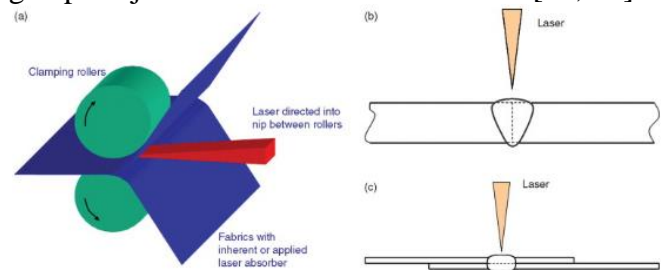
Direct laser welding formats: (a) welding into a nip between rollers, (b) butt welding, and (c) overlap film welding [22]
